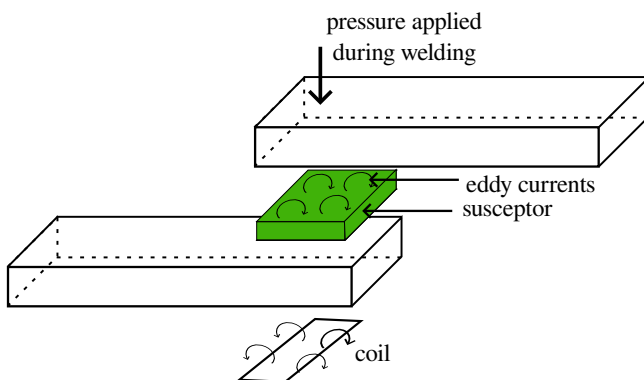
Induction welding setup (based on (Ahmed et al., 2006))
